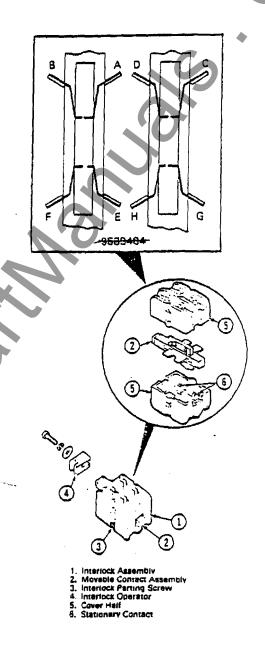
Auxiliary Interlock Assembly, Partial Exploded View
